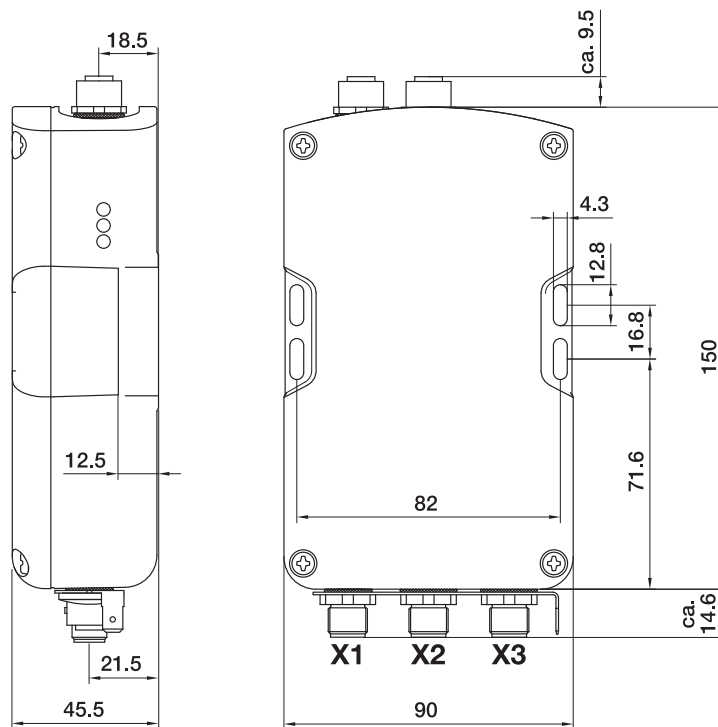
Mechanical connection BIS M-6000-007-050-00-ST24 (dimensions in mm)
